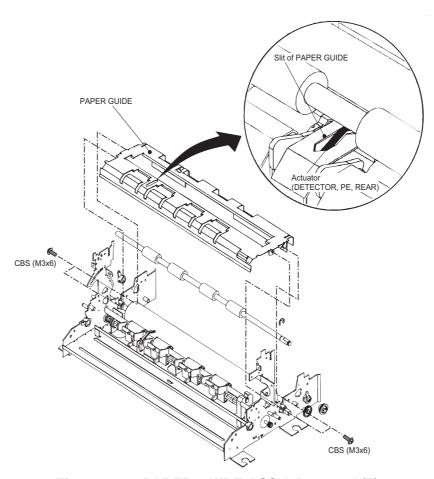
PAPER GUIDE ASSY. Removal (5)
